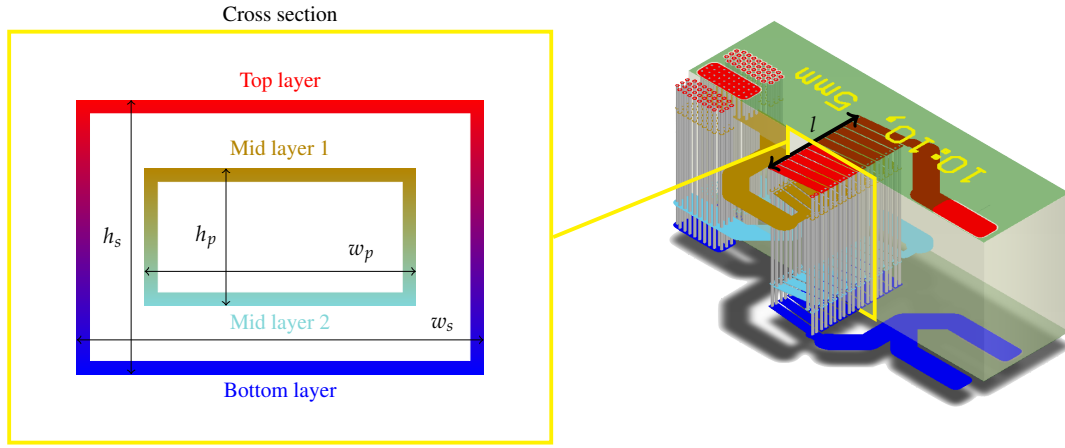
Dimensions of the PCB embedded solenoid transformer (nested configuration)
